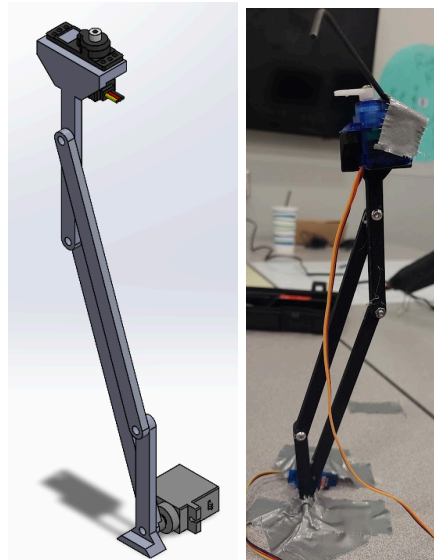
CAD (left) and prototyped (right) versions of the four-bar lift
